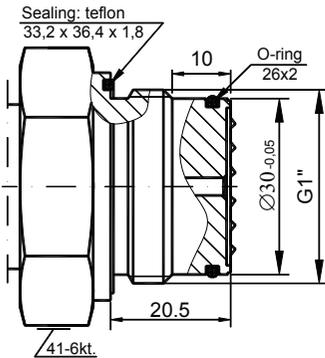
CG1-type connector with flush diaphragm with G1" thread,
